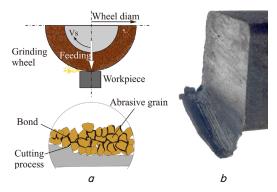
Interaction between the cutting process and the cutting results: a — cutting process; b — cutting results a deformed side
